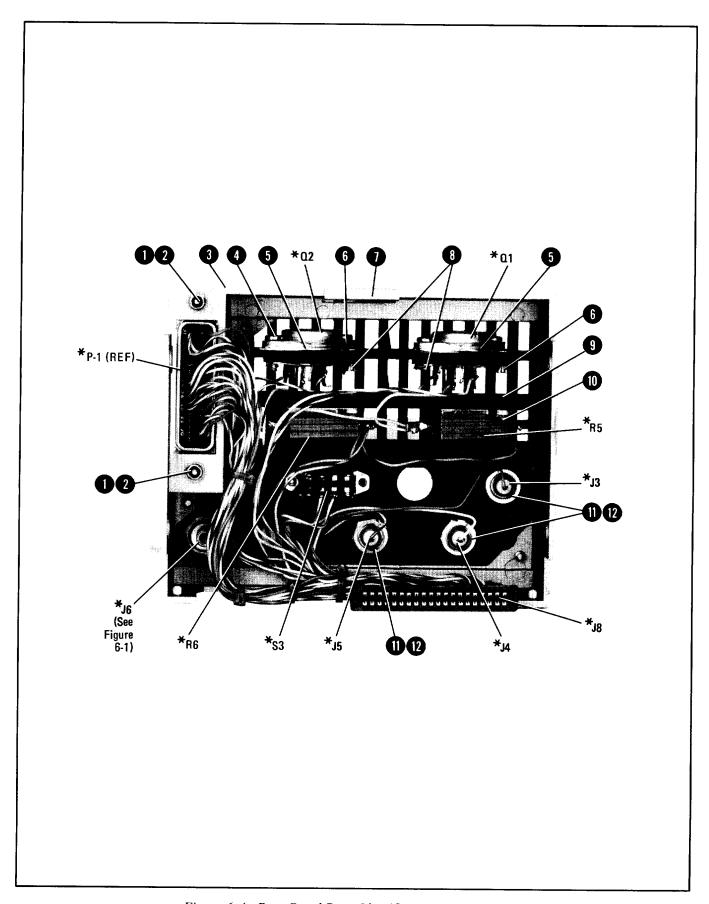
Rear Panel Parts Identification (CHANGE F)
